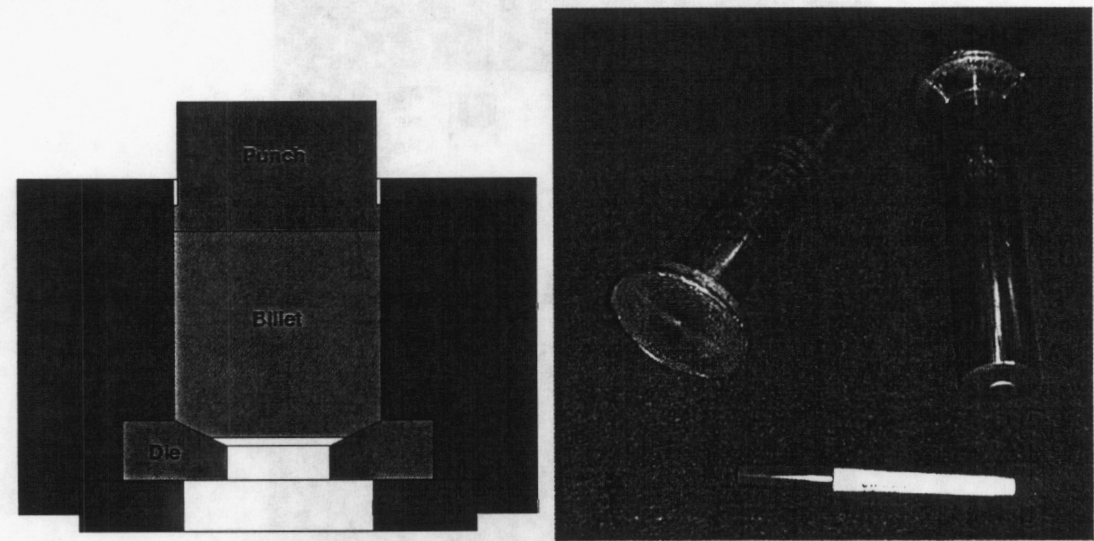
(a) Schematic drawing of the forward extrusion process and (b) Photograph of the copper bar after forward extrusion from 76.2 mm to 41.9 mm.
